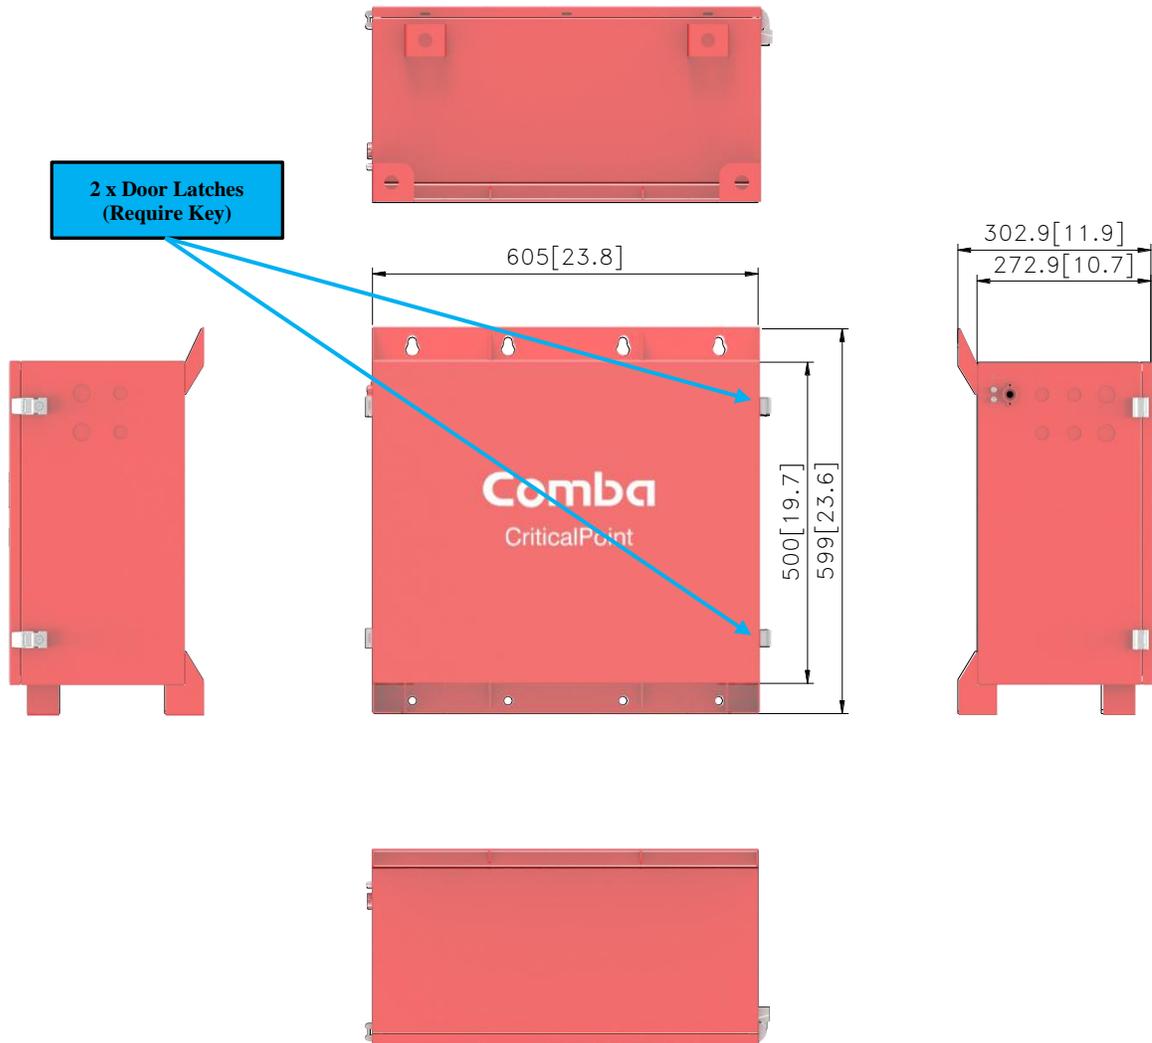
V3 BBU Cabinet Dimensions – Front, Side and Bottom View
